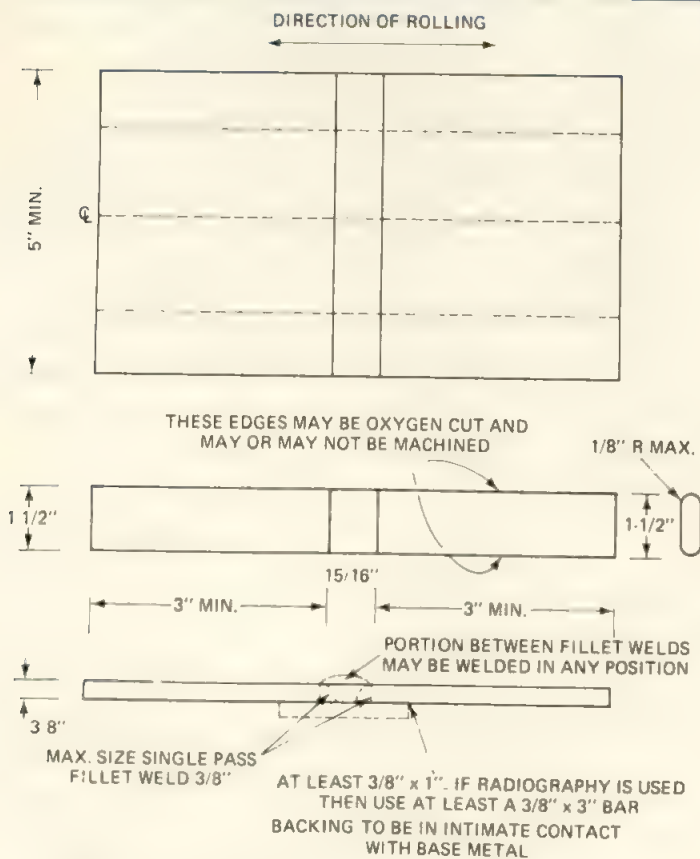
AWS fillet weld root bend test.
